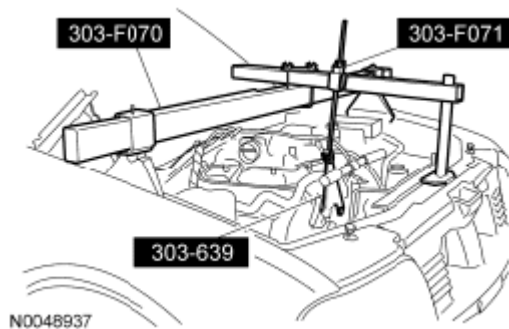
Identifying Engine Support Bar, Support Hook And Engine Support Bracket
